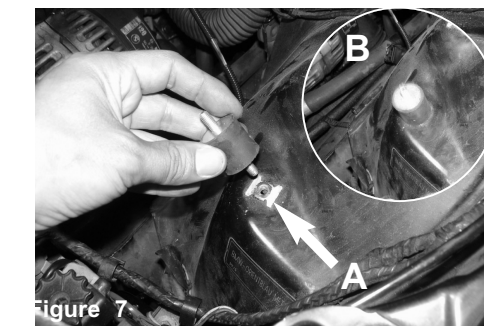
A) install m6 vibramount to the threaded insert on frame from step 5. B) Secure and tighten the vibramount.
